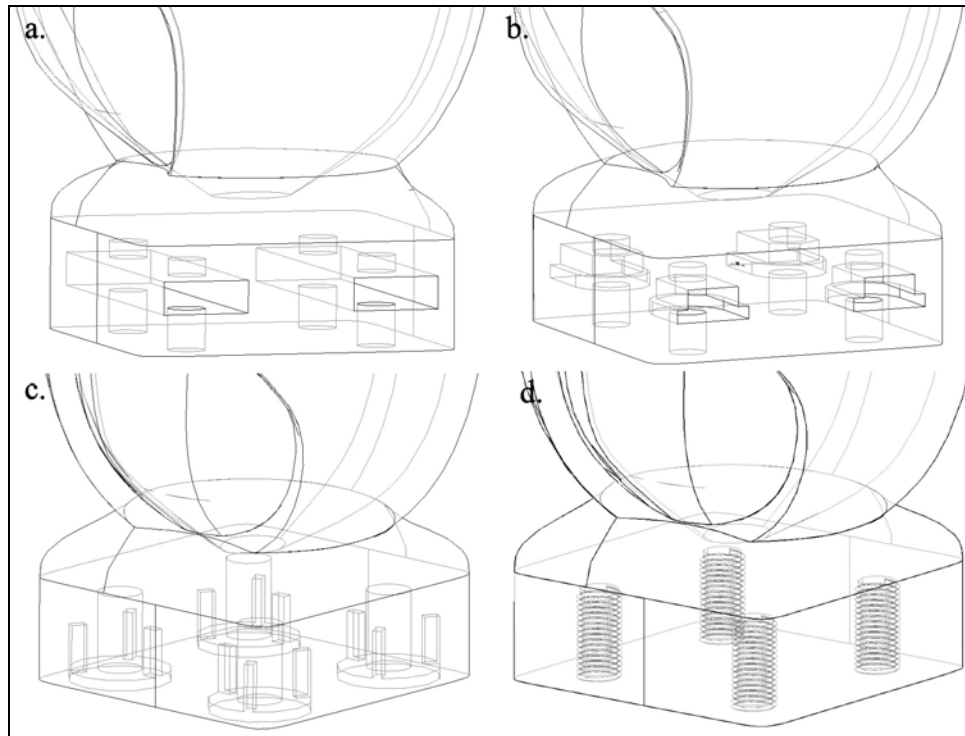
(a) UTHSCSA Attachment Fitting Design; (b) Flange Nut Attachment Fitting Design; (c) T-insert Attachment Fitting Design; (d) Helicoil and Direct Tapped Attachment Fitting Design.
